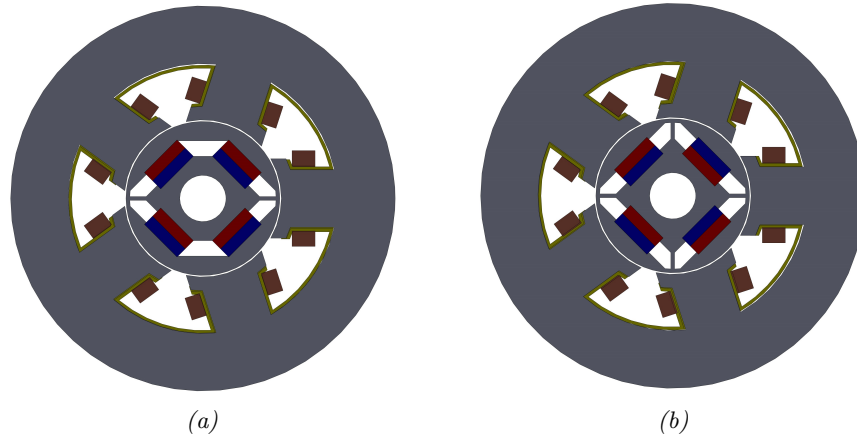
This figure shows the Solidworks models of the two separate rotors used for the prototype, the magnets and coils are shown in the same way as in the figure for the assembly. The rotor with 2 poles is shown in (a) and the rotor with 4 poles is shown in (b) these models can be converted to DXF format and directly imported into the FEMM program.
